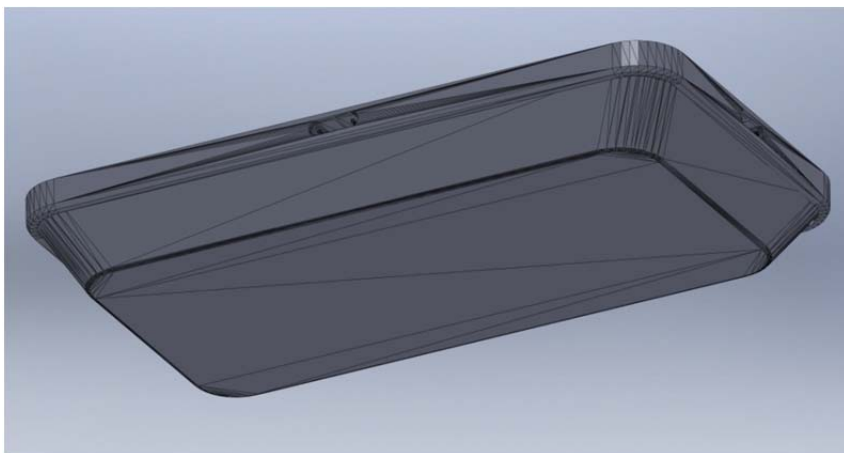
Solid model of the lighting module which will include OLED lighting panel, lens and fixturing.
